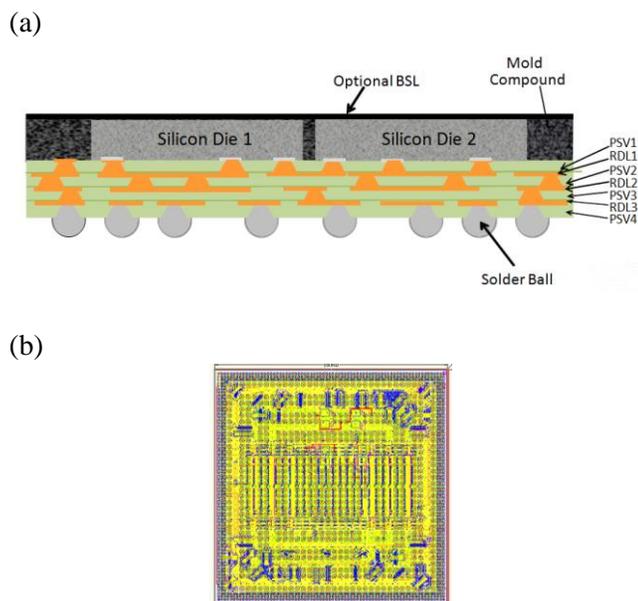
(a) Schematics of cross-section and (b) 3-layer RDL design layout of test vehicle
